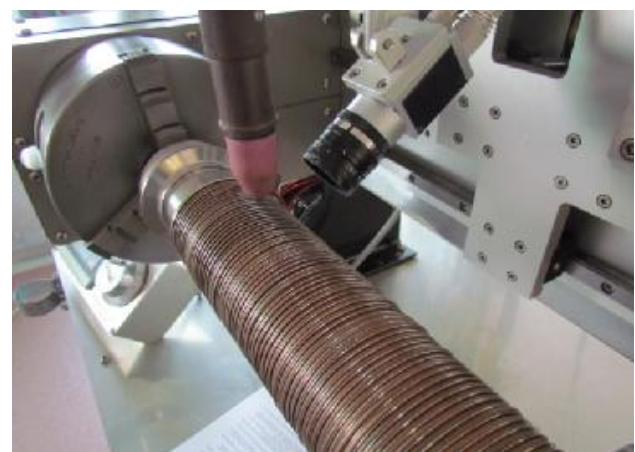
PLASMA ARC WELDING EXPERIMENTAL SETUP
